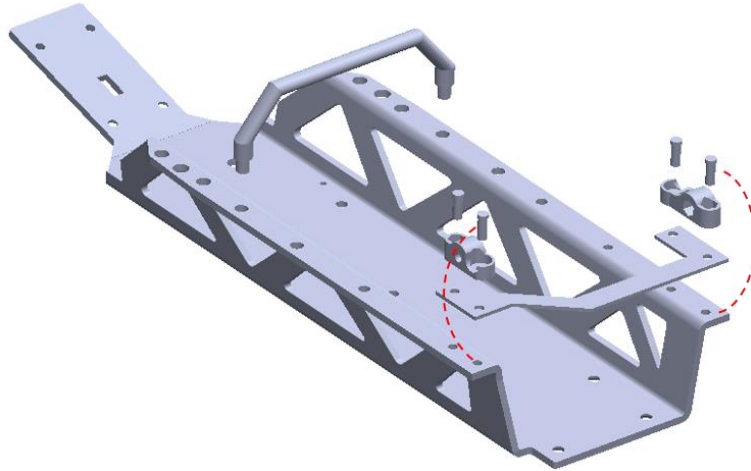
1: Holes on the Chassis Mate Pins on Different Part
